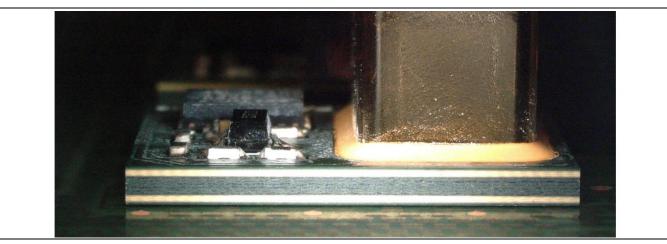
Side view of a mounted MLGA module. The solder joints below the module substrate cannot be seen.
